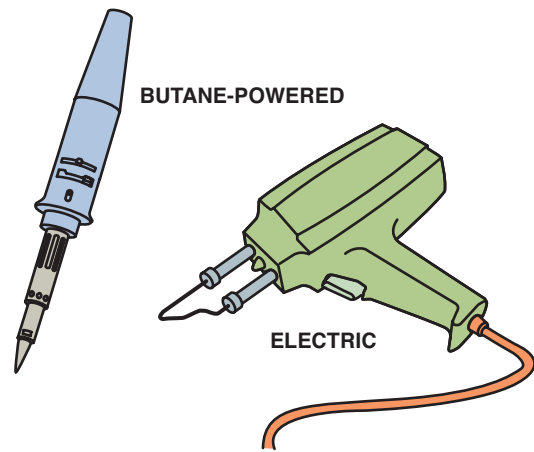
Electric and butane-powered soldering guns used to make electrical repairs. Soldering guns are sold by the wattage rating: The higher the wattage, the greater the amount of heat created. Most solder guns used for automotive electrical work usually fall within the 60 to 160 watt range.
